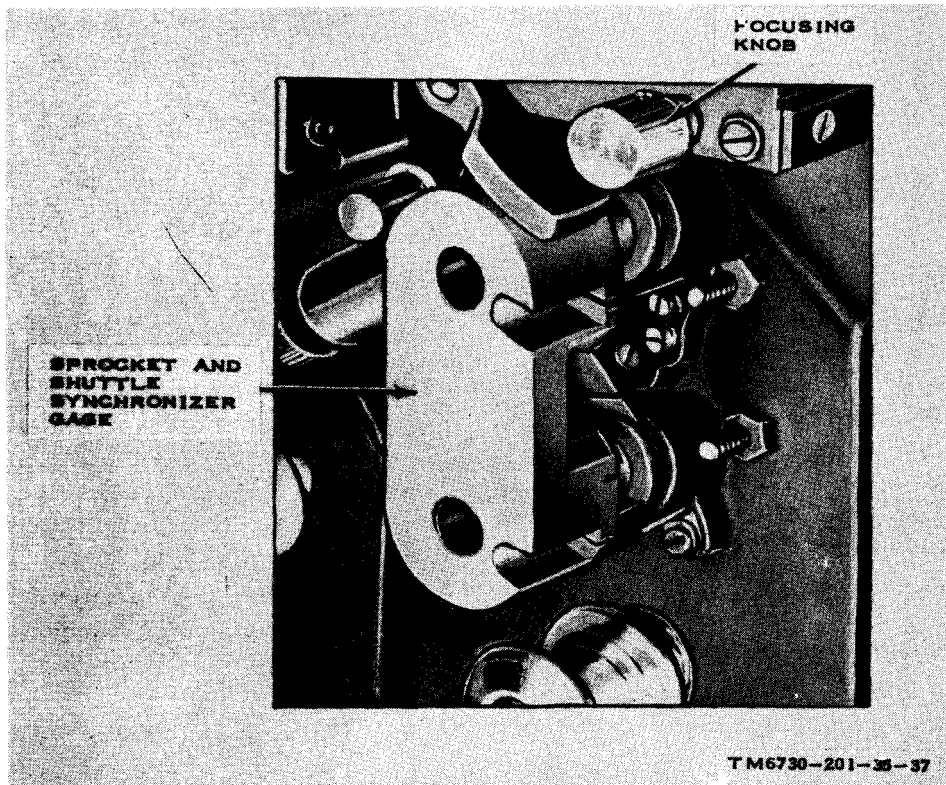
Sprocket and shuttle synchronize gage in position.
